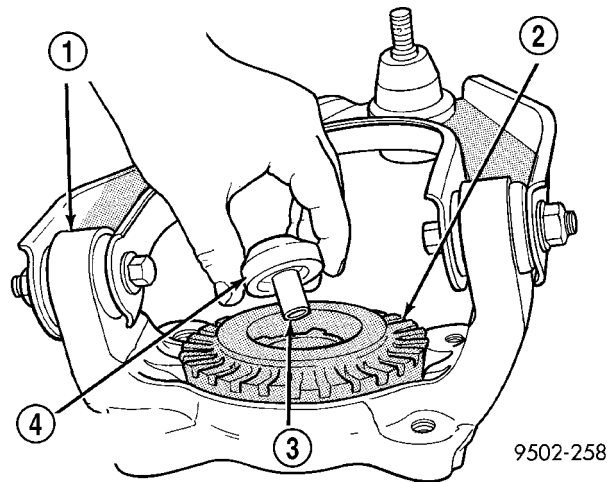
Shock Absorber Rod Lower Isolator Bushing
